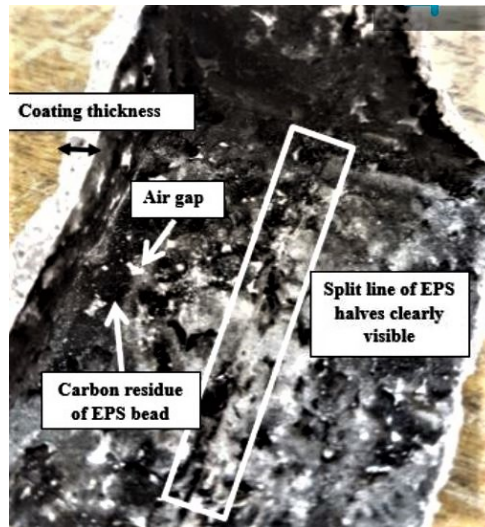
Photo of the inner layer of the refractory coating after casting indicating carbon residue due to pyrolysis of the EPS pattern
